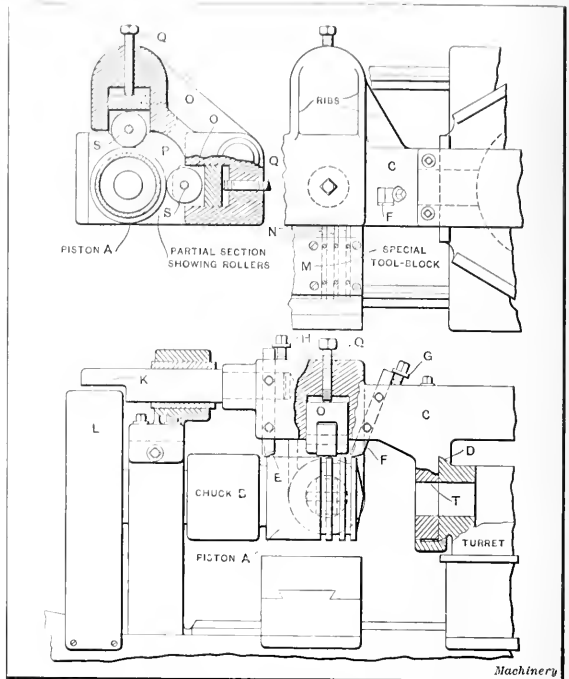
Multiple Turning Tool equipped with Pilot and Roller Back-rest
